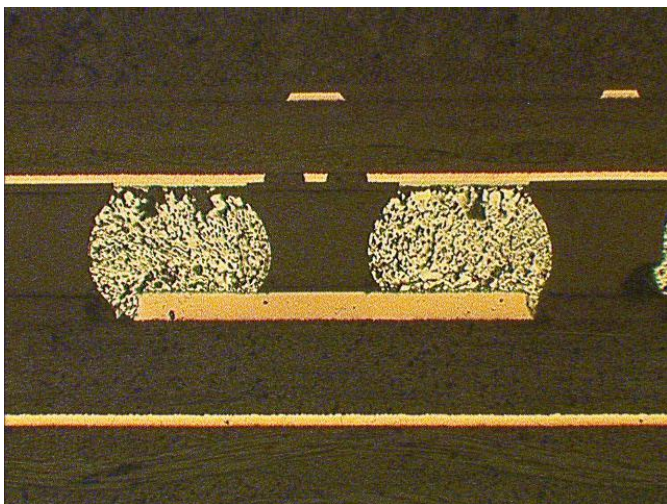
CSP-100 Solder Joints, Board 103, Component U33, SN100C/SnPb, Failed @ 2932 Cycles
